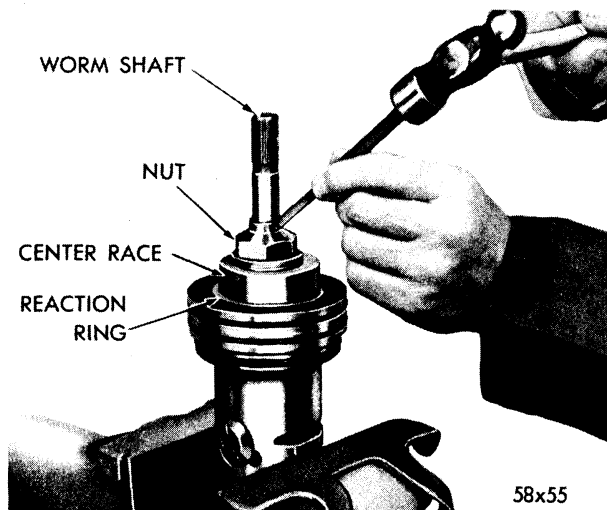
Locking Worm Shaft Bearing Adjusting Nut
